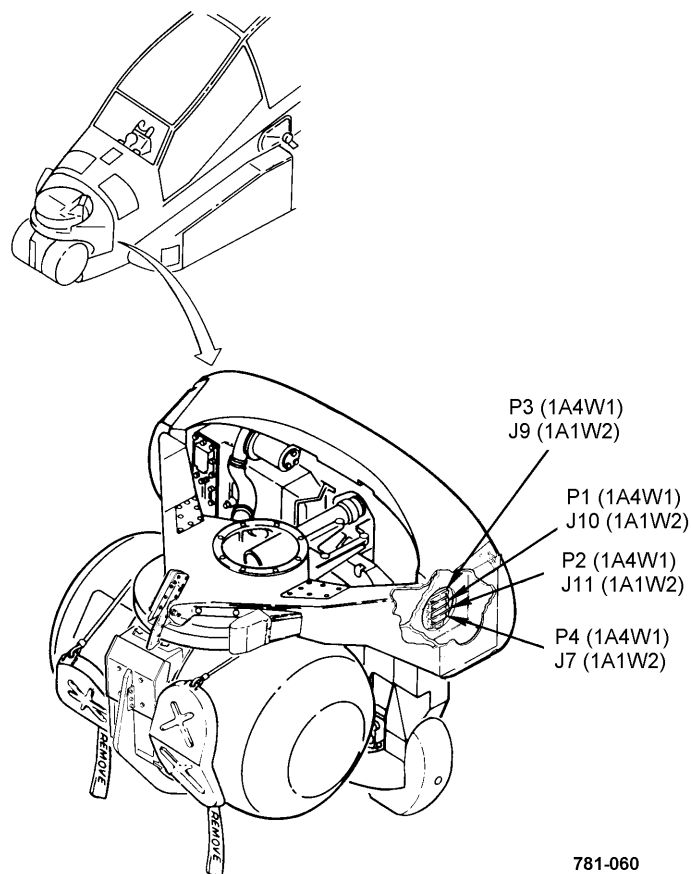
Aircraft Interface Assembly 1A1W2 Connector Locations
